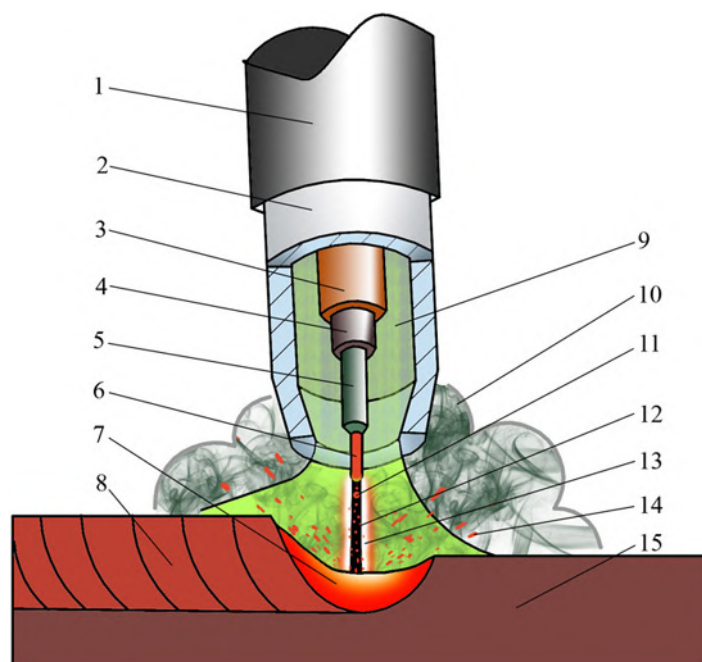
Formation of welding fume during MIG and MAG welding: 1 – torch; 2 – gas nozzle; 3 – insulator; 4 – tip adapter; 5 – contact tip; 6 – welding wire; 7 – welding pool; 8 – weld; 9 – shielding gas; 10 – gases and welding fume; 11 – a drop of molten wire; 12 – arc column; 13 – arc flame; 14 – sparks (splashes) of liquid metal; 15 – base metal.
